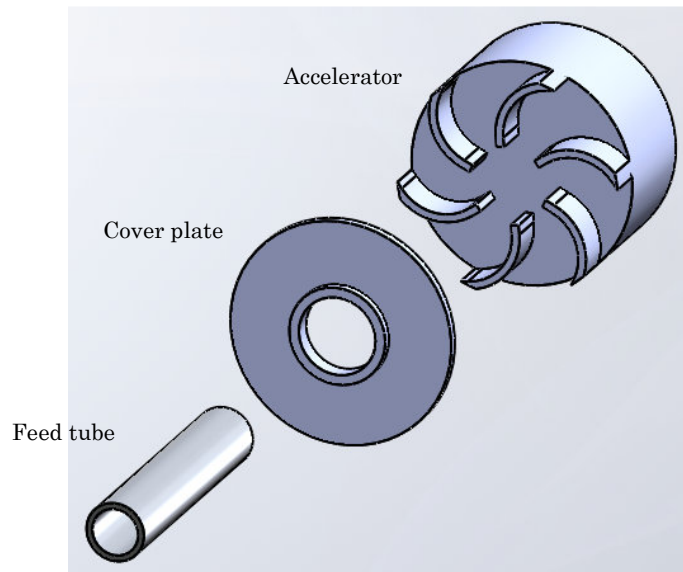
Exploded view of the Disk accelerator showing the end cover plate and feed tube
